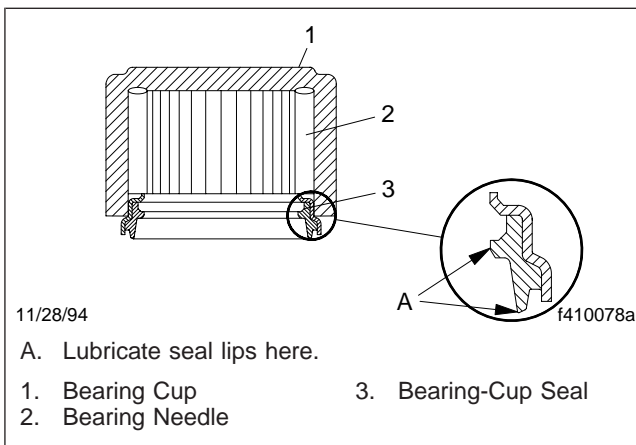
, Sectional View of a Half-Round End-Yoke U-Joint Bearing Cup
